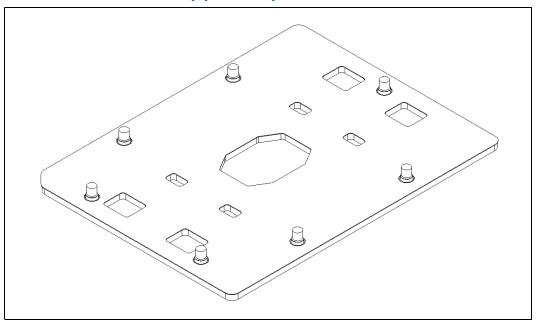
Square Bolster Plate Assembly (ISO View)
